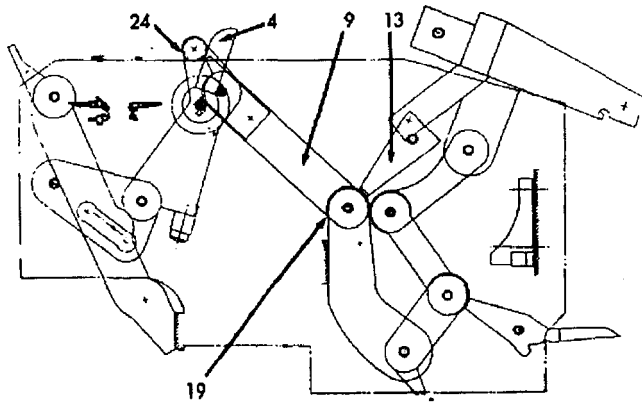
Shows breaker open - springs discharged. Motor starting springs charge with the driving cranks (4) picking up the rolls (24) throwing links (9) into tension and pulling latch roll (19) back of closing latch (13).
